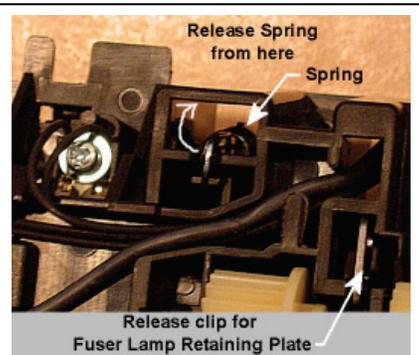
Releasing the Pressure Springs and the lamp retaining plates.
